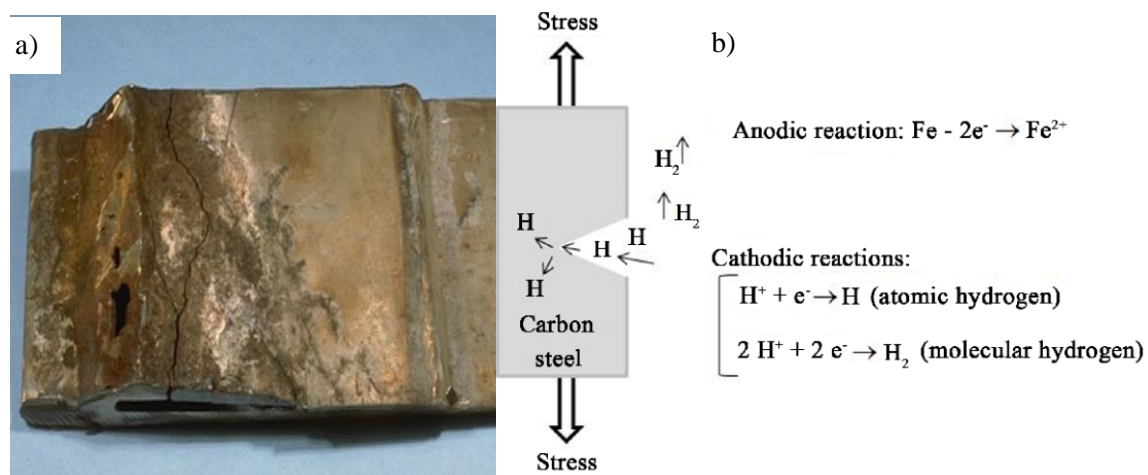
(a) Stress corrosion of a welded alloy steel joint [25] and (b) its mechanism [26].
